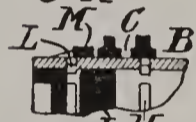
Admission of steam through ports L, exhaust H being closed.
